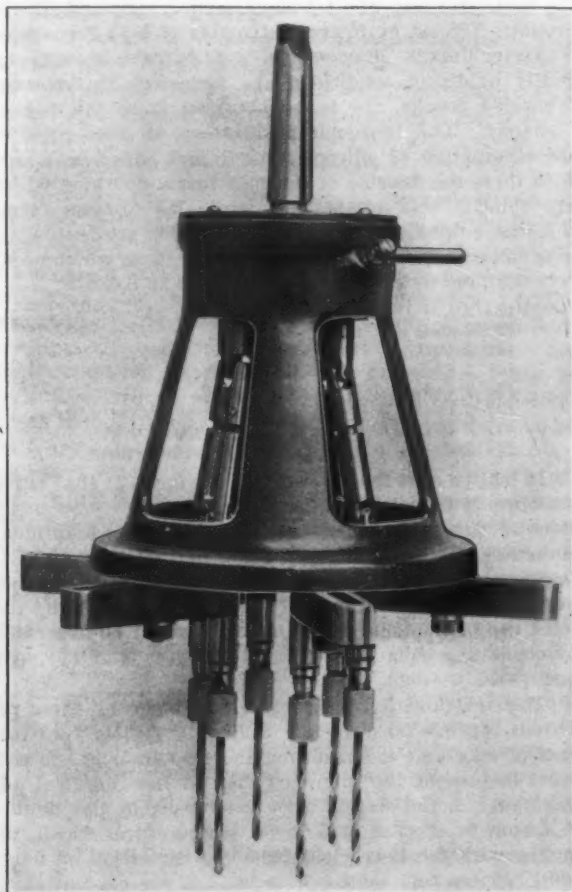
The Baush Multi-Spindle Drill Head Adapted to Be Used with the No. 3-A Machine or any Single Spindle Drill.
